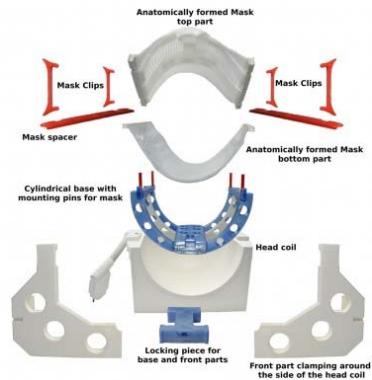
Explosion graphics of frame and head mask together with lower part of head coil.
